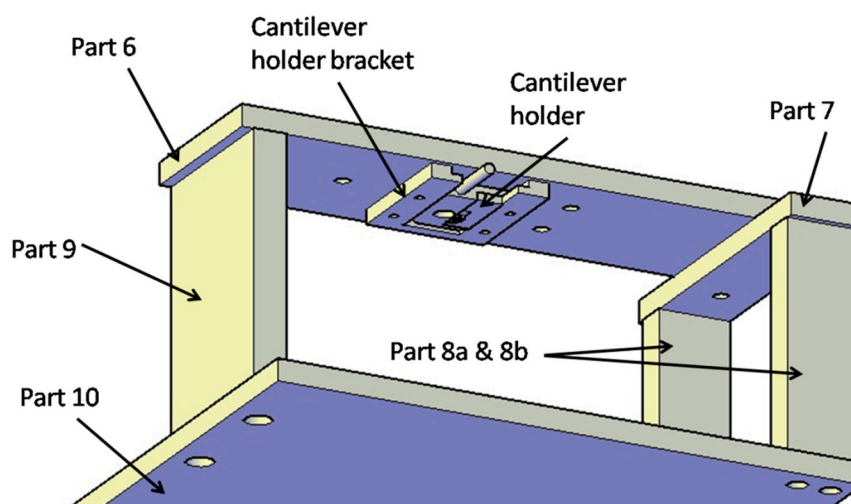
The assembly detail for this section consisting of a cantilever holder and its bracket. The bracket is fixed to the bottom of part 6.
